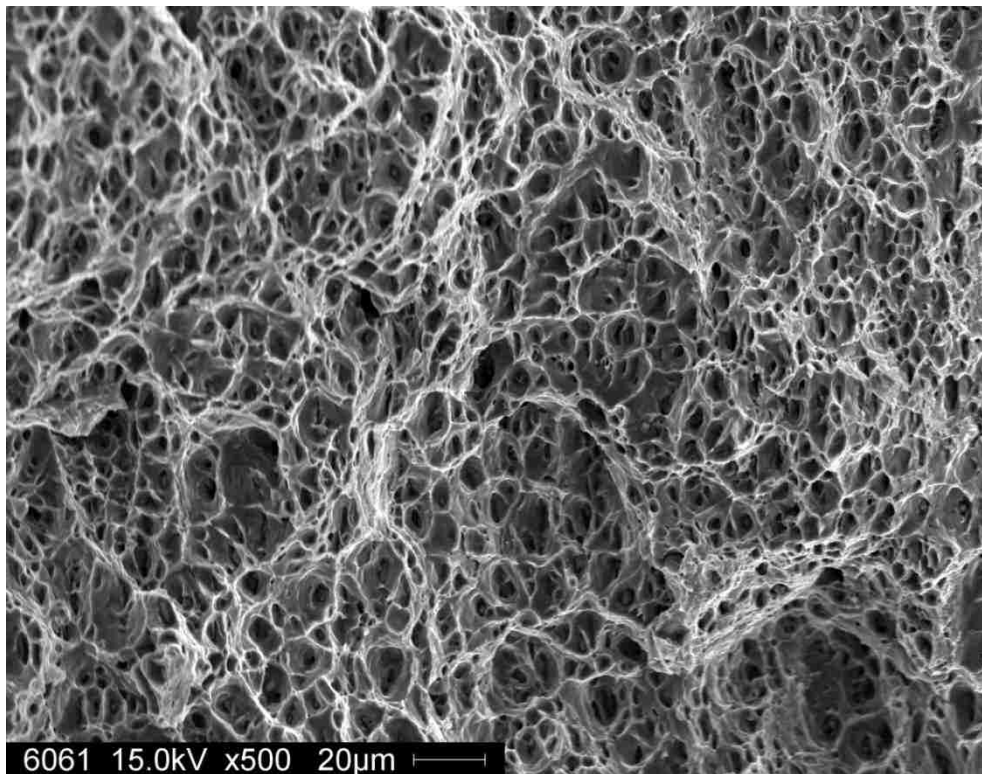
Fractograph of the tensile specimen of welded wrought alloy 6061.
